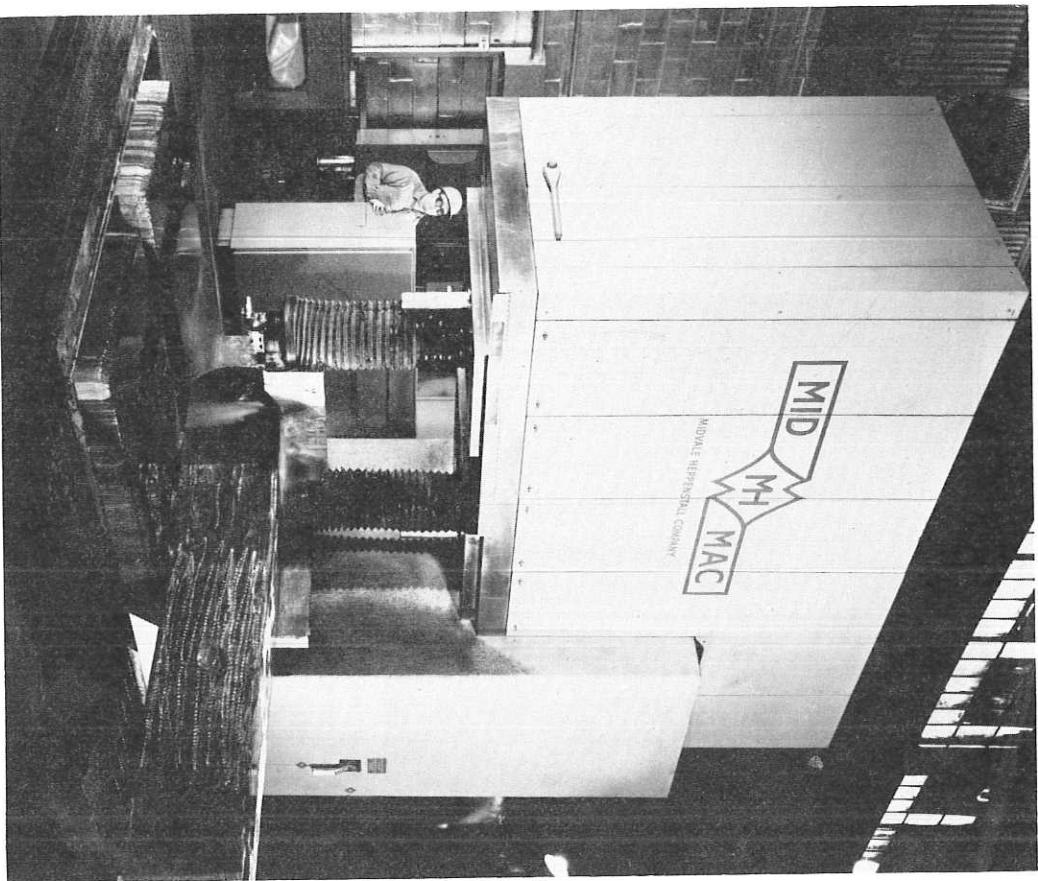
Horizontal electrochemical machine. The work enclosure slides to the right, to the position shown over the electrolyte tank, to give access to the tooling. (Courtesy of the Anocut Engineering Company.)
